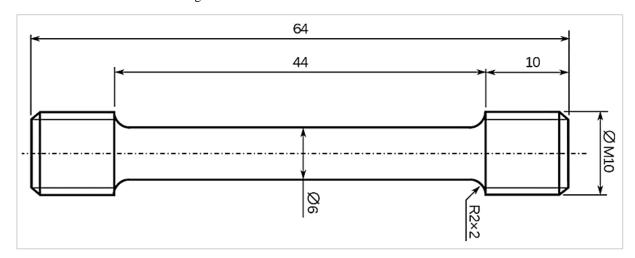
Tensile specimen dimensions comply with the requirements of DIN 50125
